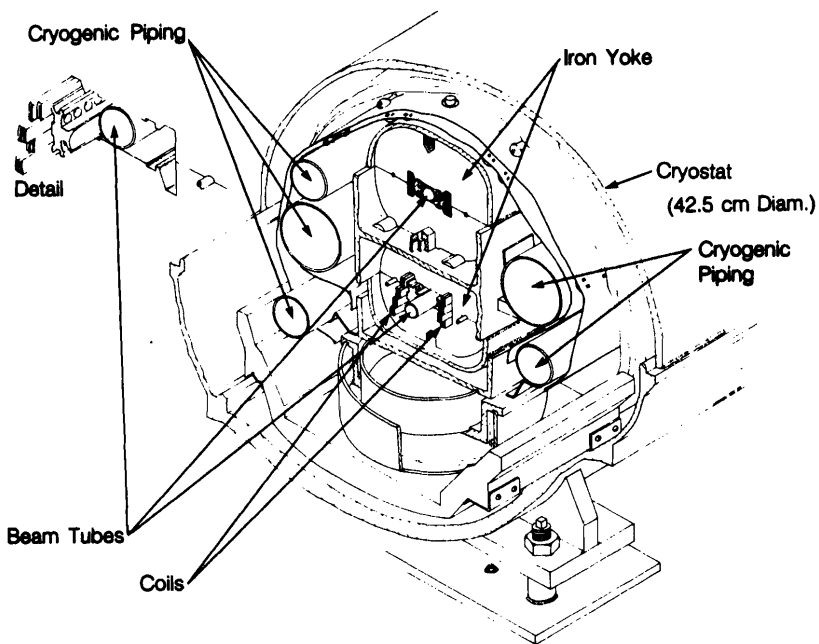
Cutaway perspective view of the 3T, superferric dipole magnet.
